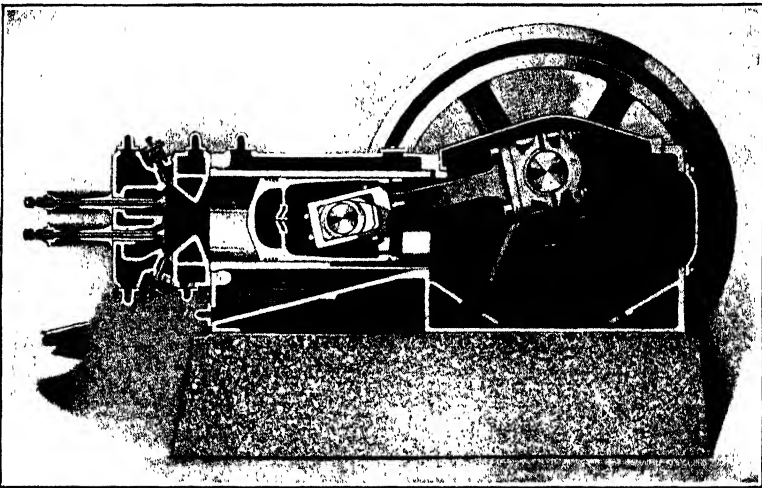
Ingersoll-Rand type "PO" moderate-pressure oil engine.
